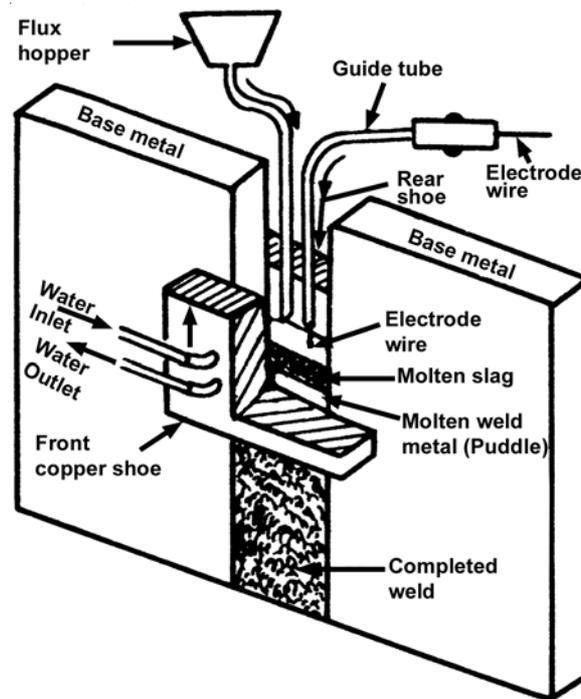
, Schematic diagram of electroslag welding. The copper shoe at the front side is shown in section to show the welding details.
